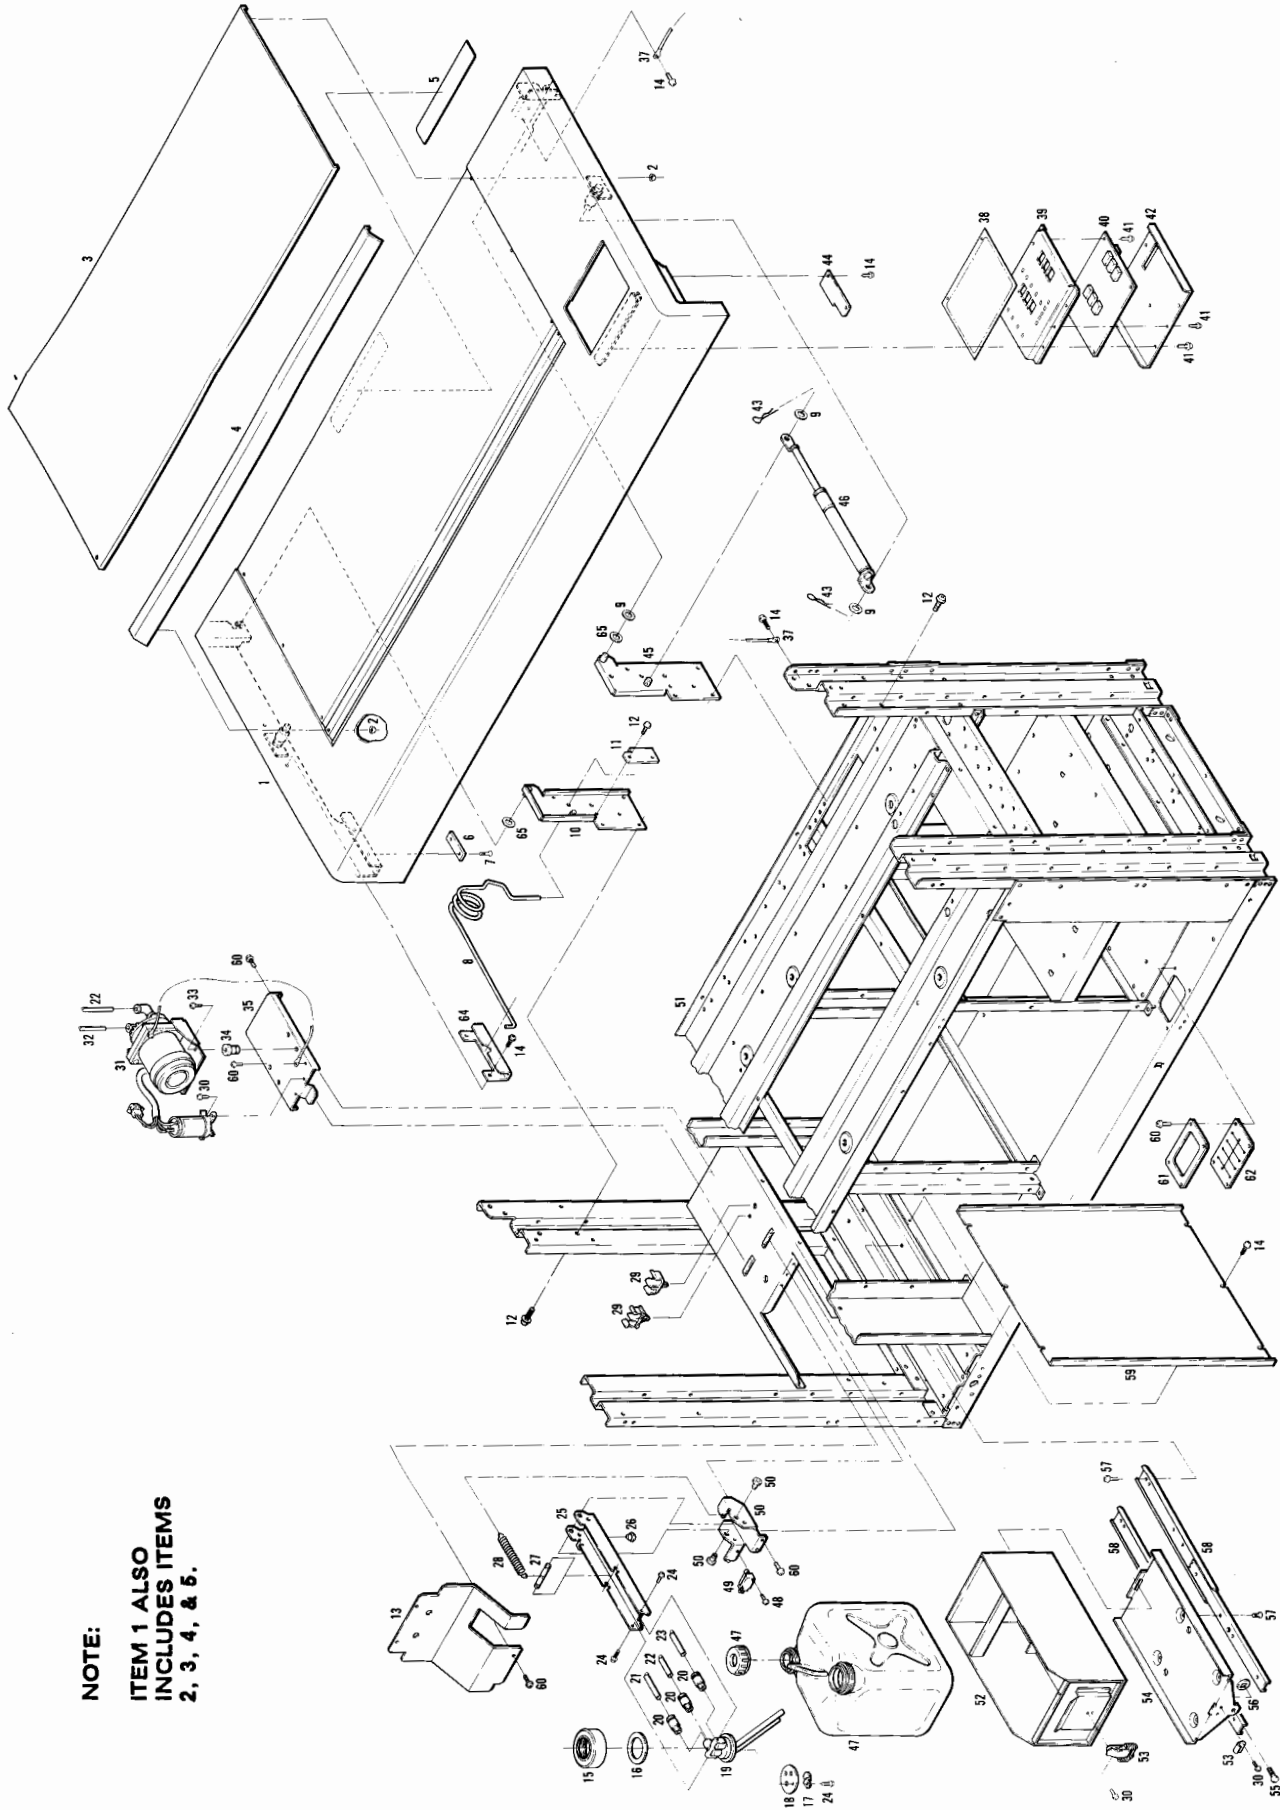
Frame Assembly 3 Illustrated Parts Breakdown
